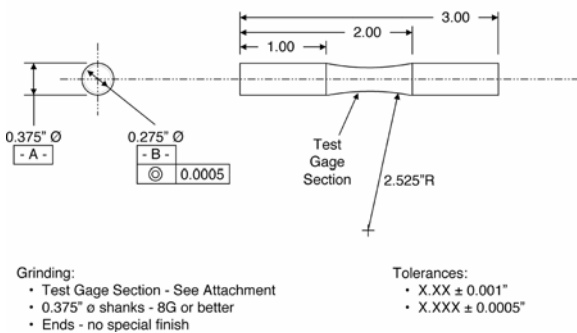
Schematic of RBS specimen geometry. This specimen is being subjected to rotary bending and monotonically loaded to fracture—a new test method developed in this program.
